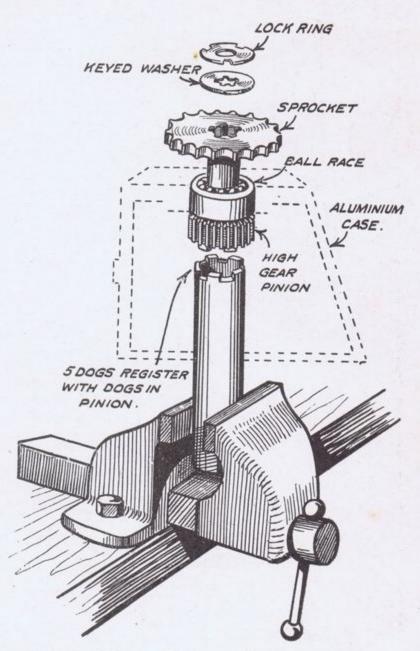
Using a Dogged Tool for holding the High-gear Pinion during Reassembly.
